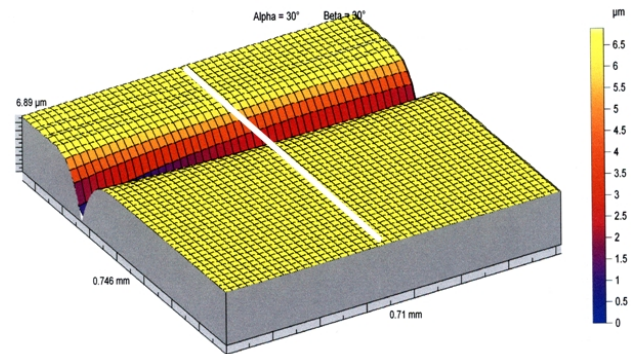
Structure of a deep and continuous scratch on the surface of Weller endoprosthesis head with pointed place of intersection
